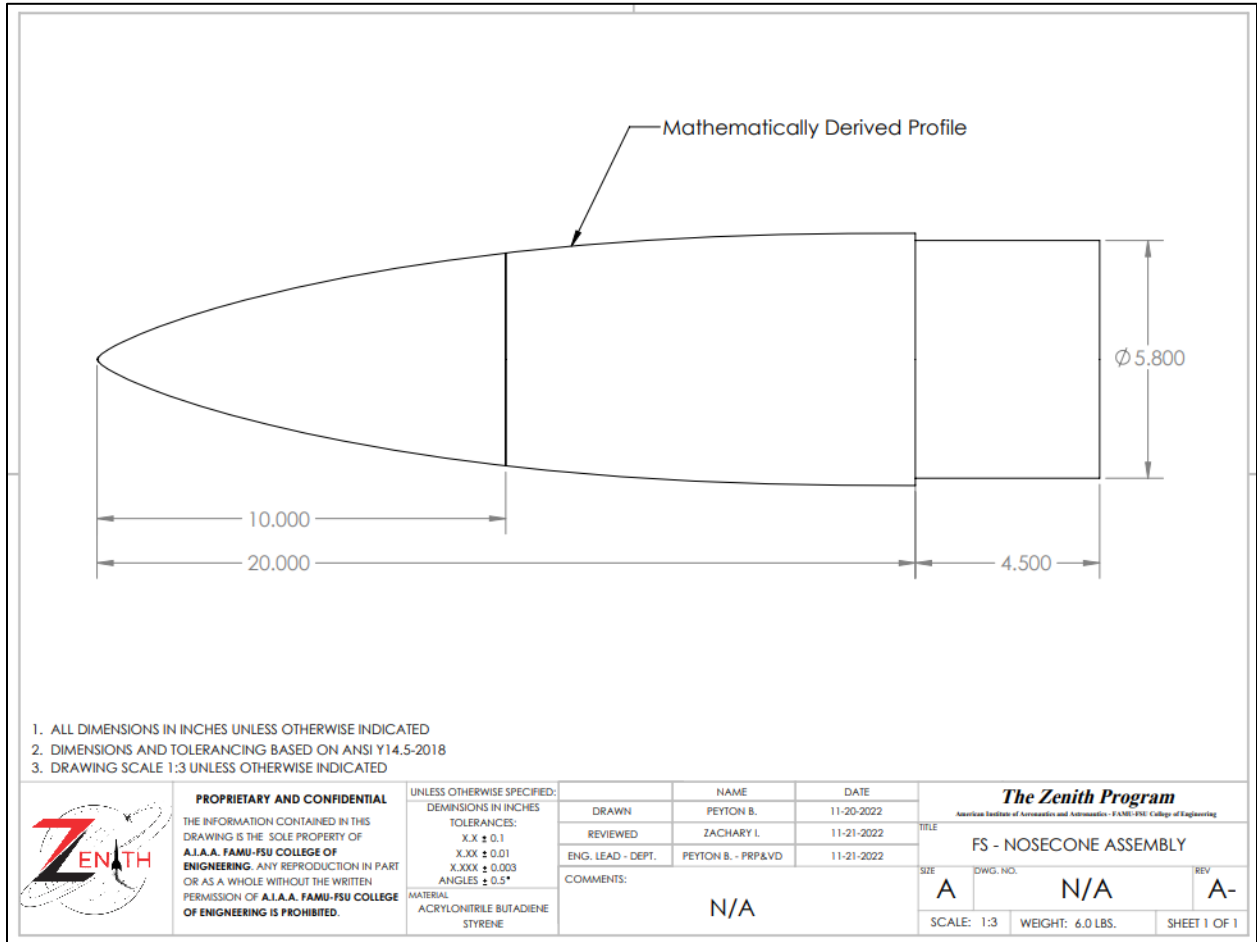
LD-Haack Nosecone Assembly CAD Drawing
